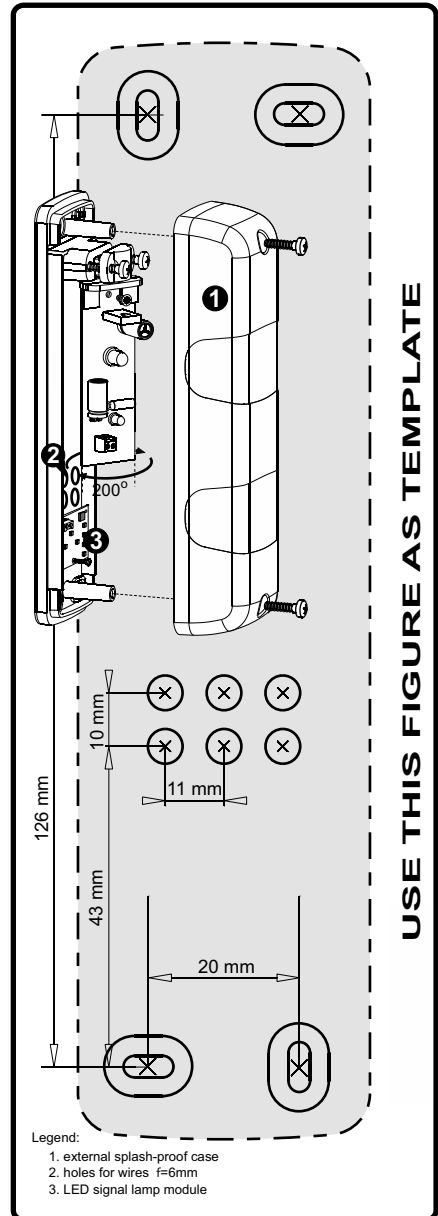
Holes spacing in the scale of 1:1 with the assembly drawing.
